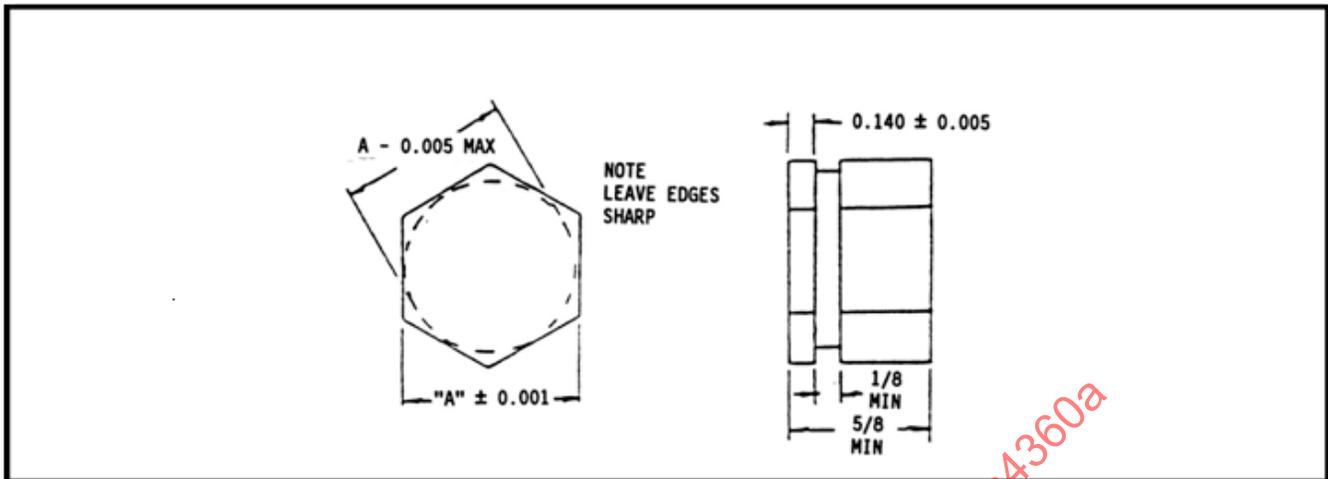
SPECIMEN FOR ALUMINUM MANDREL TEST
